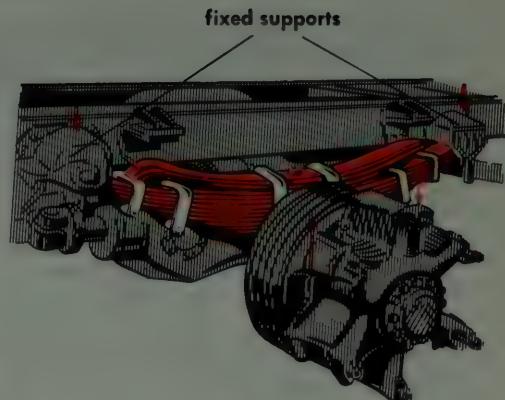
LONGITUDINAL SPRING OF RIGID AXLE
